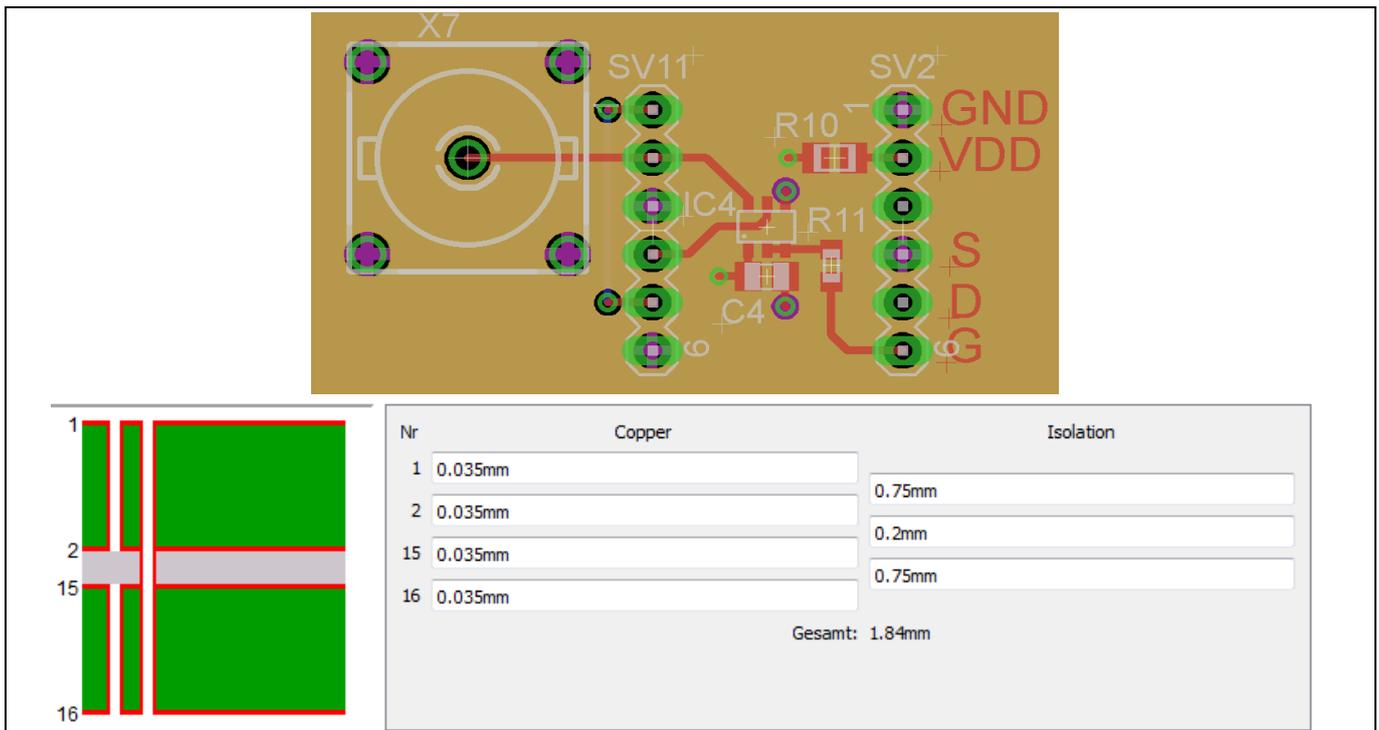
1EDN7511B (SOT23-6 package) in 4 layer PCB
